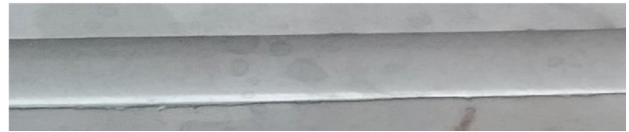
Rotation speed: 600 min^{-1} , welding speed: 300 mm/min
